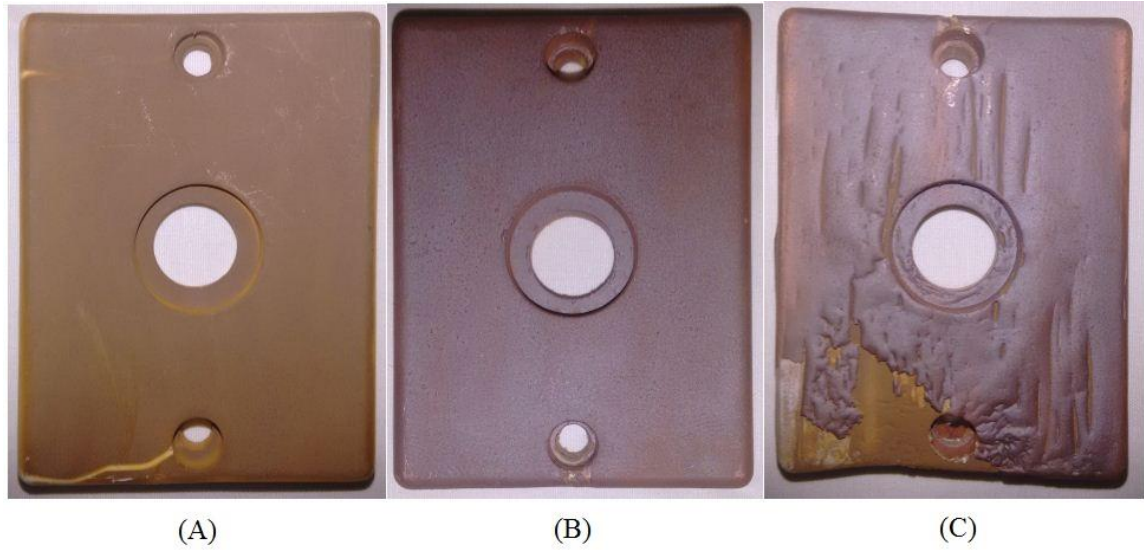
PHOTOGRAPHS OF IN PROCESS WORKPIECE
